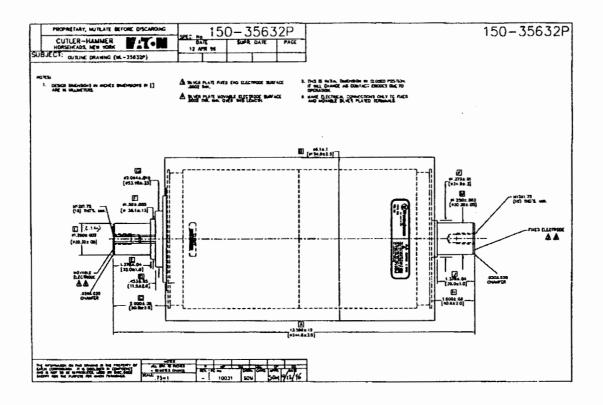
12kV Vacuum Interrupter Bottle Manufacture's Outline Drawing
